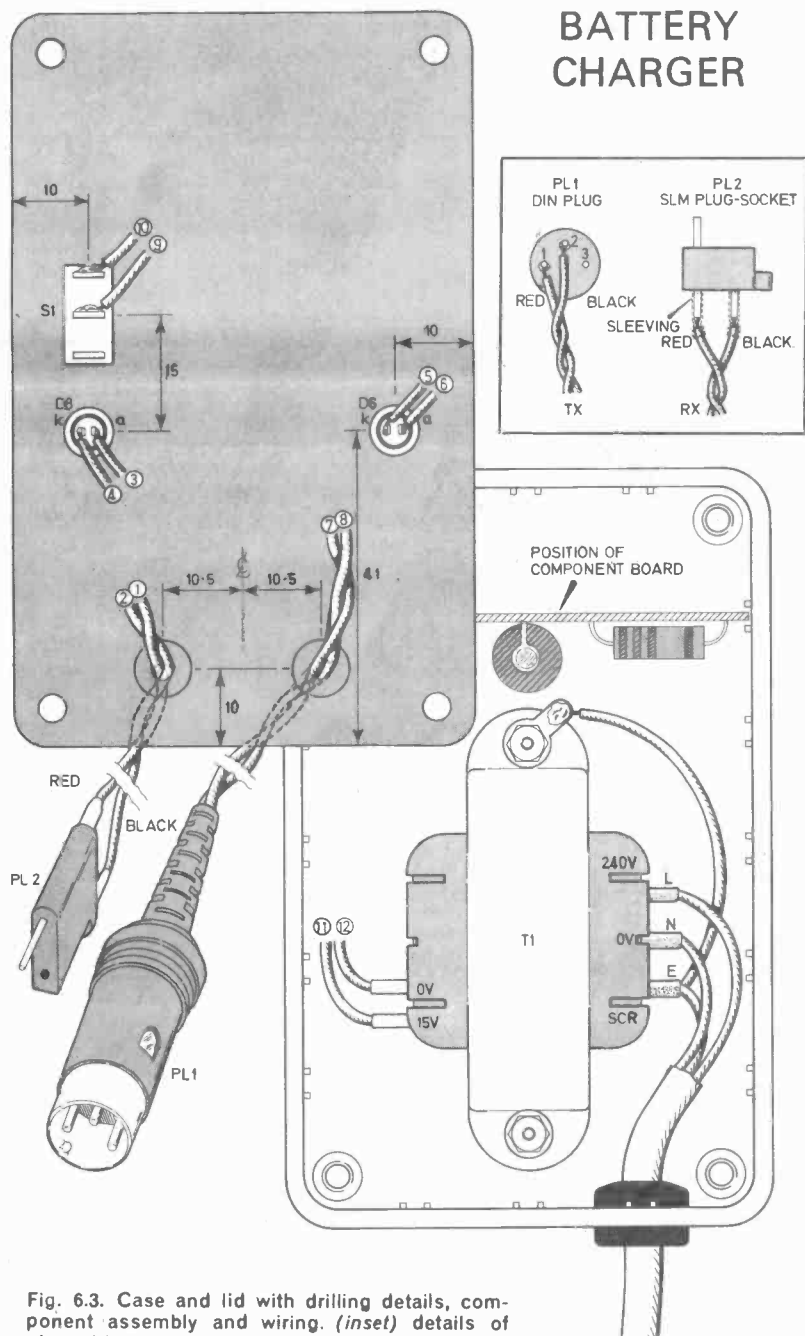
Case and lid with drilling details, component assembly and wiring. (inset) details of plug wiring.
